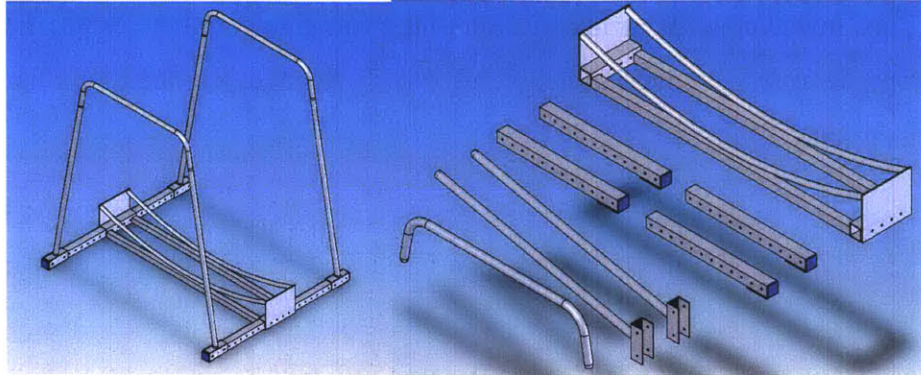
Closed Section Approach (Assembled and Disassembled for Storage/Shipping)
